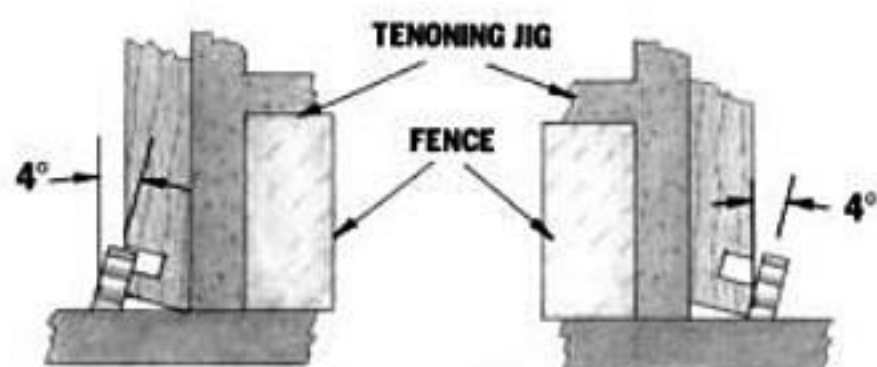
CUTTING THE CORNER JOINT GROOVES
